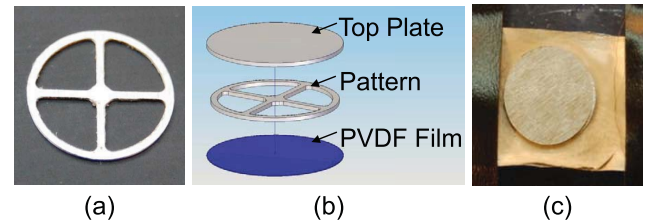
(a) Photograph of the aluminum crosshair pattern; (b) exploded view of the assembly; and (c) photograph of the assembled microphone.
